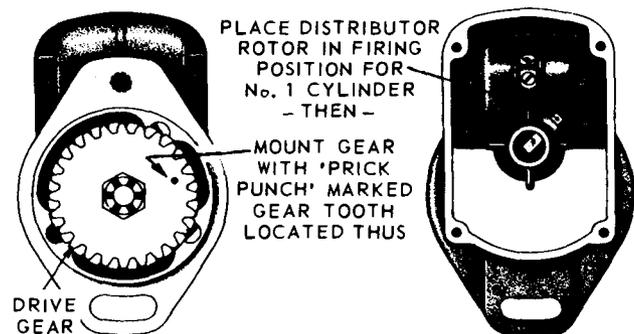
, DRIVE GEAR MARKING AND ASSEMBLY
